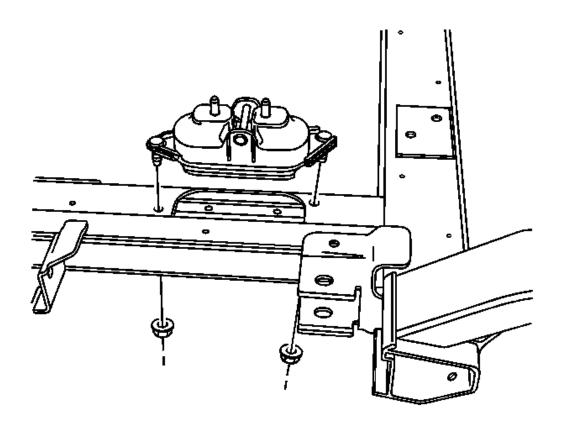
Motor Mount & Frame Nuts Courtesy of GENERAL MOTORS CORP.
